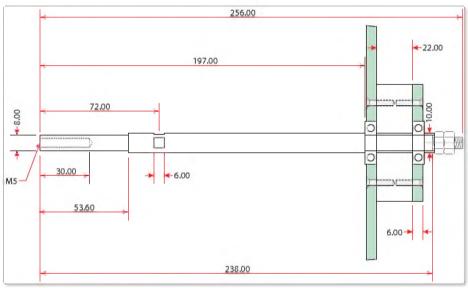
Manufacturing drawing for the Wyvern extension shaft (courtesy of Kevin Trott). This shaft replaces the standard shaft fitted to the Turnigy ROTOMAX 50 cc electric motor
